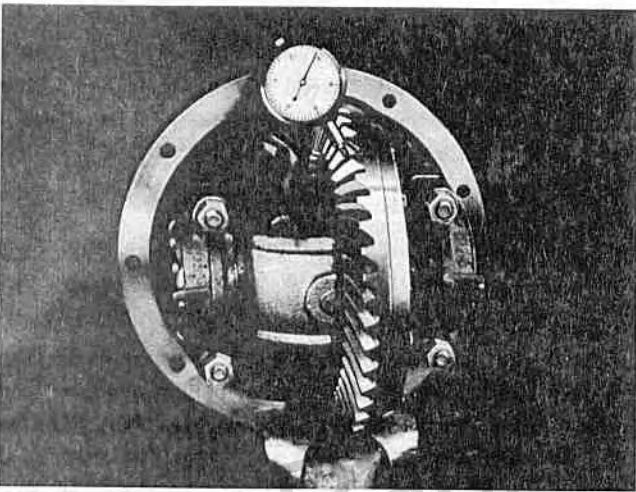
Measuring the Ring Gear to Pinion Backlash with an Indicator
